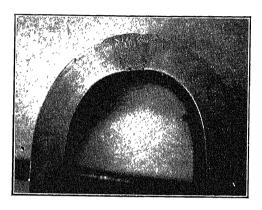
Deeply Etched Section of Multiple Arc Welded $\frac{1}{2}$ -in. Plate
